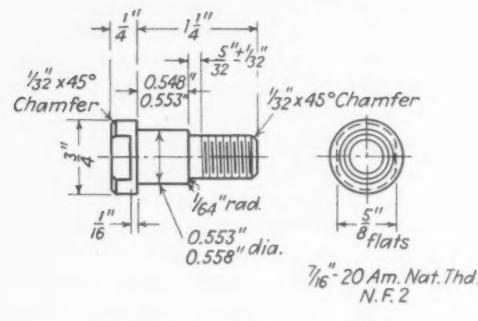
This cold headed shoulder bolt costs 50 per cent less than if made on a screw machine. It is made of SAE 1020 steel.
